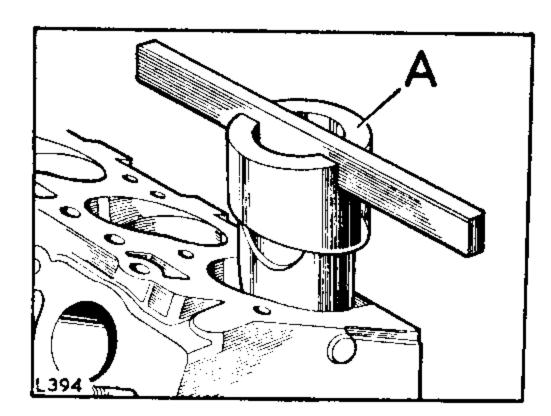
Fitting a cylinder liner A—Press block, Part No. 246650
